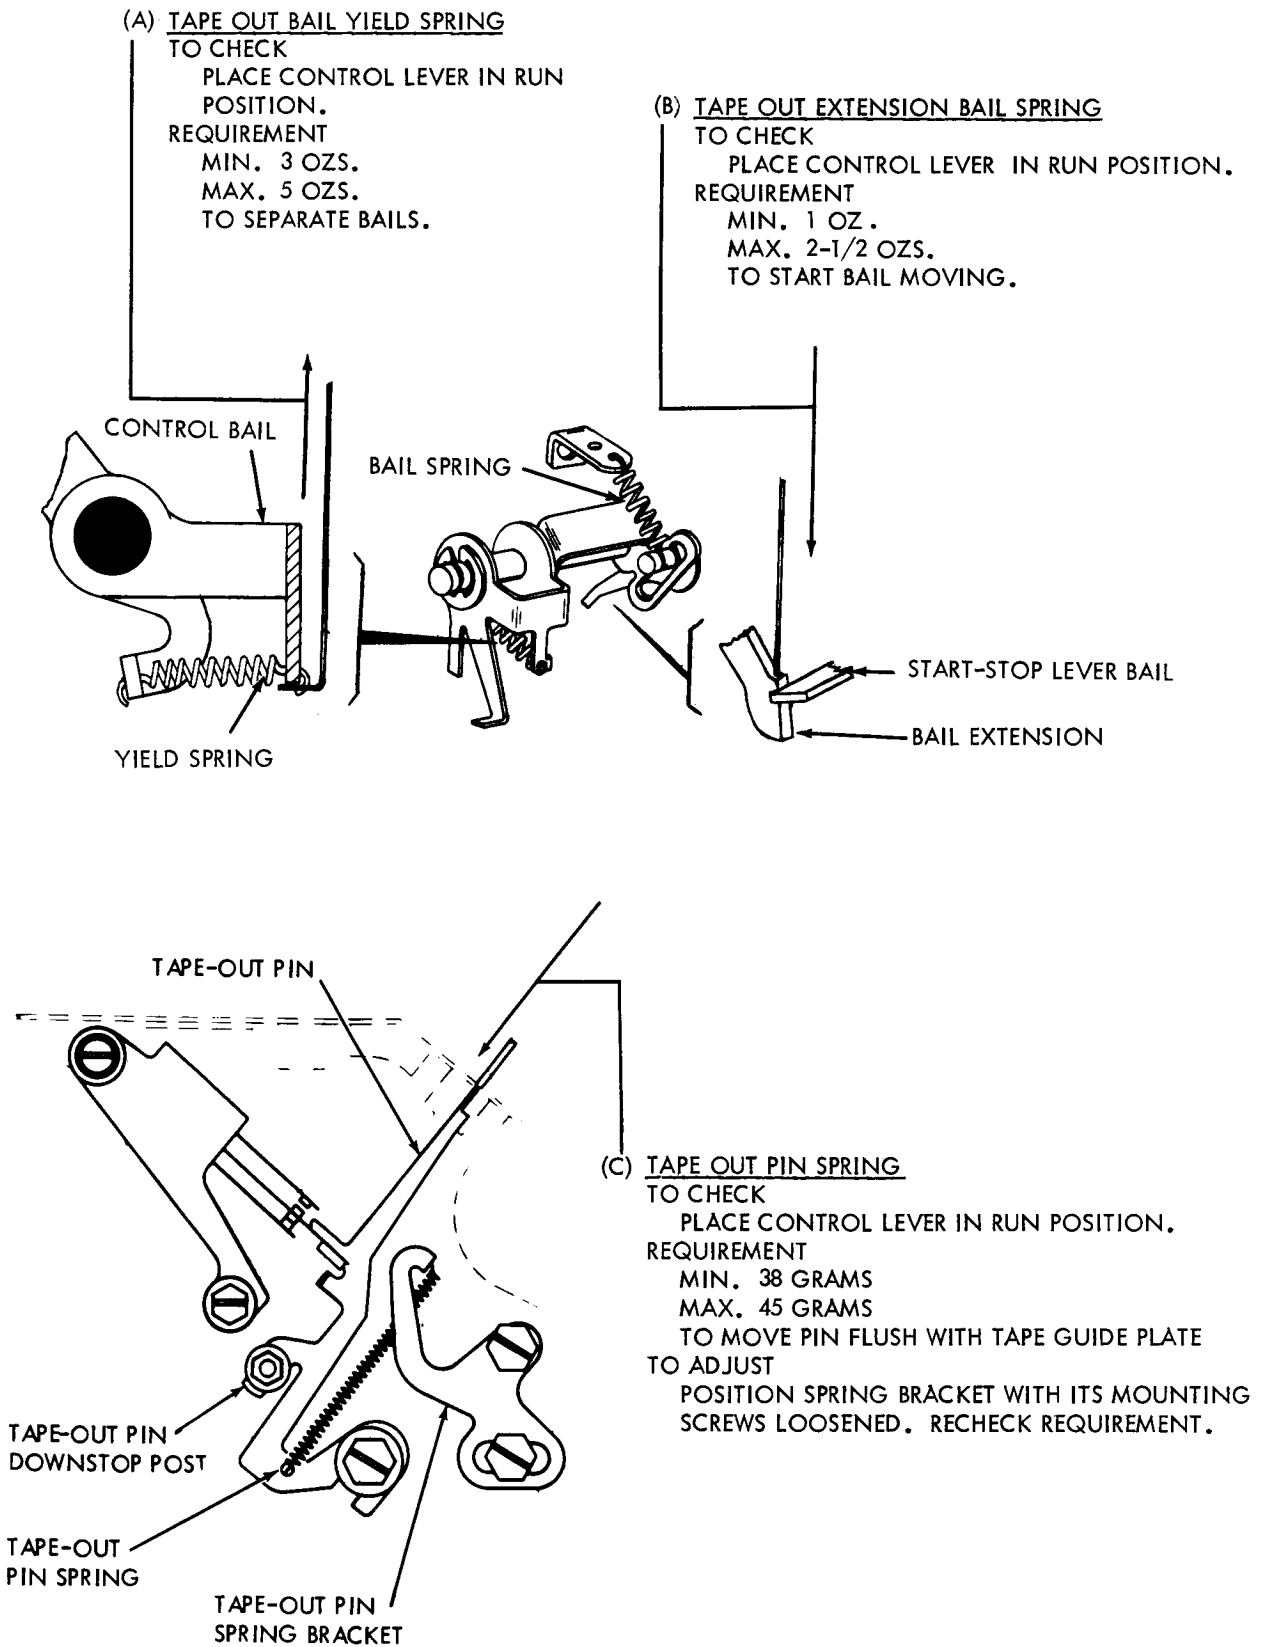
TAPE-OUT PIN AND BAIL ASSEMBLY
